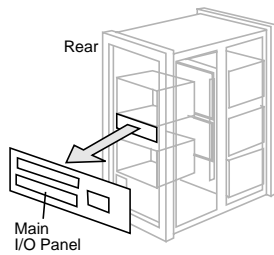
Rackmount Chassis Component - Main I/O Panel (Fixed I/O)
